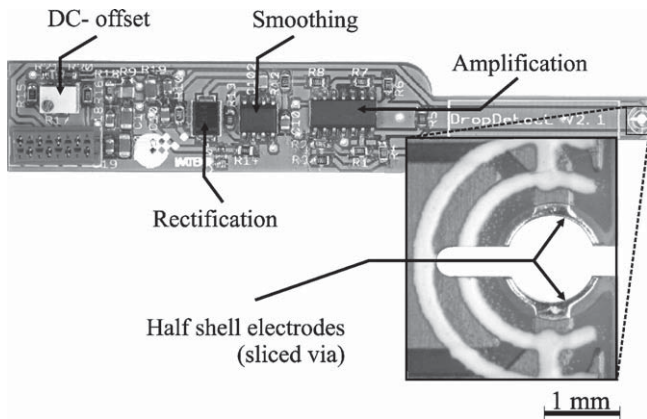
Sensor PCB prototype adapted to the PipeJet™ dispenser; enlarged aspect—the sensor capacitor fabricated by a sliced standard through connection.
